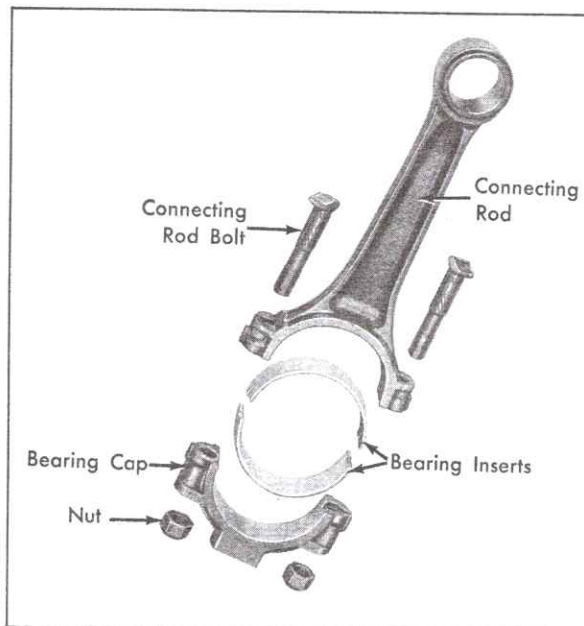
Connecting Rod &amp; Bearing Assembly
